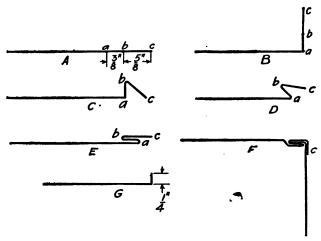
Progressive Operations of Bending Edges to Form "the Pittsburgh Seam" on the Cornice Brake.
